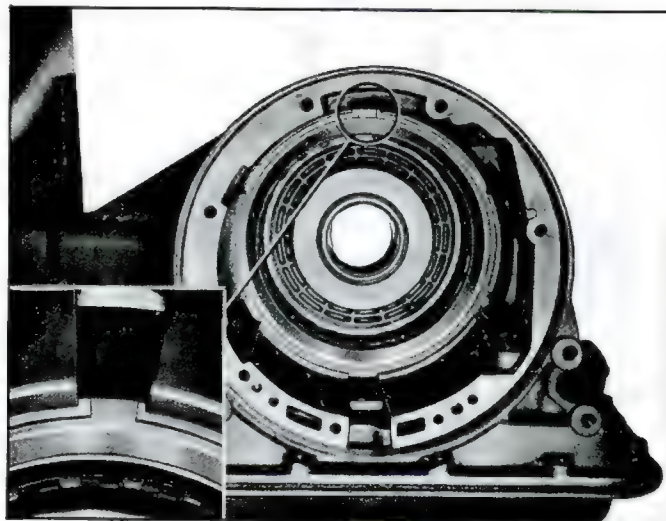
E-25—Reverse Clutch Pack Retainer Ring
